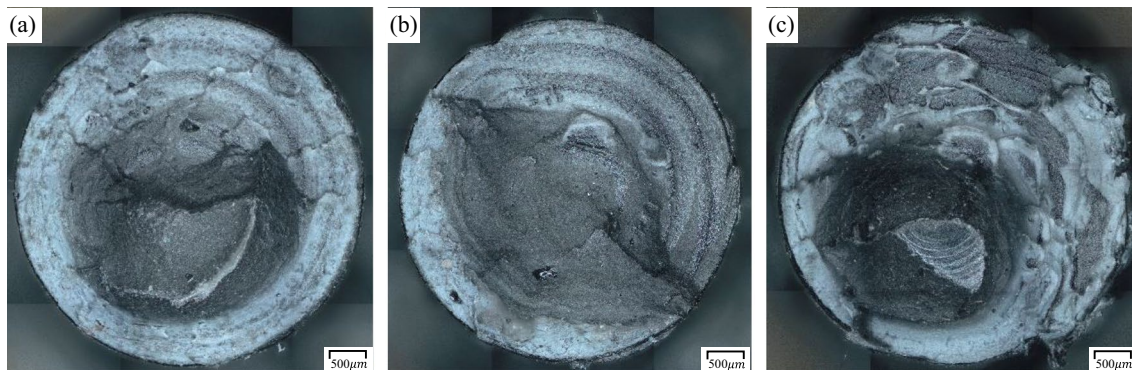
Fractured surfaces of 3D-printed stakes after breakage with a different layer height of a 0.1 mm, b 0.15 mm, and c 0.2 mm
